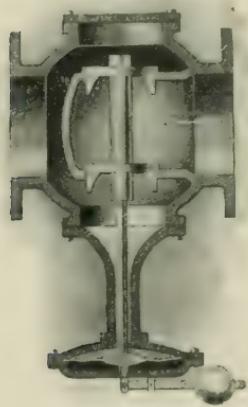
Pressure reducing valve by Kieley and Mueller.
